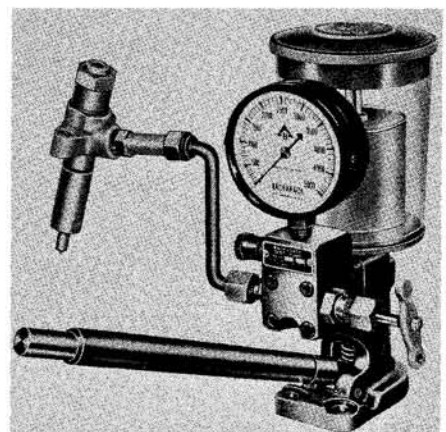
To completely test an injector nozzle requires the use of a tester as shown.
